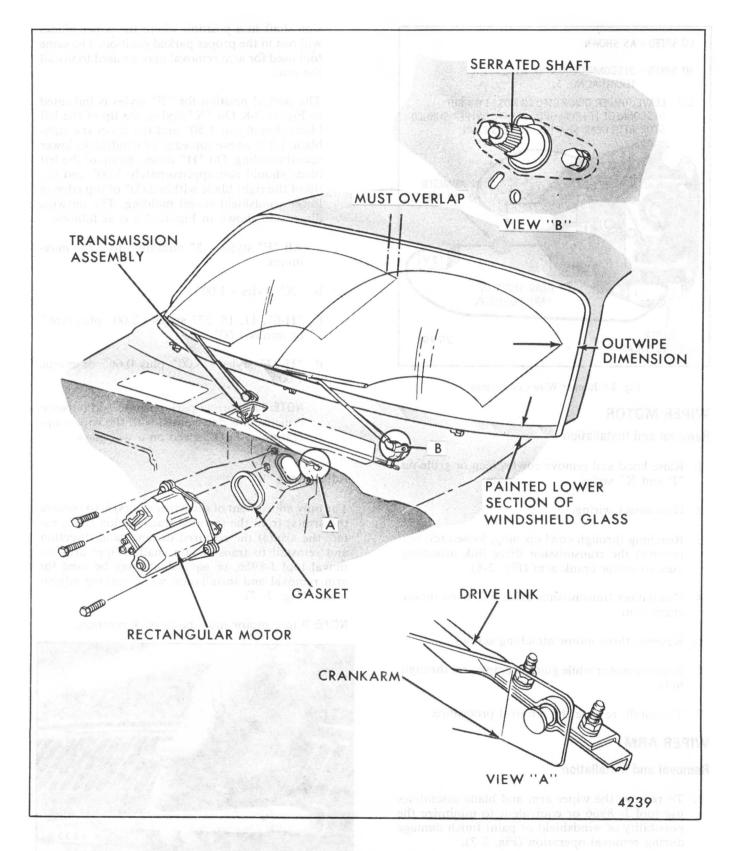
Wiper Installation and Wipe Pattern - "F" Styles
